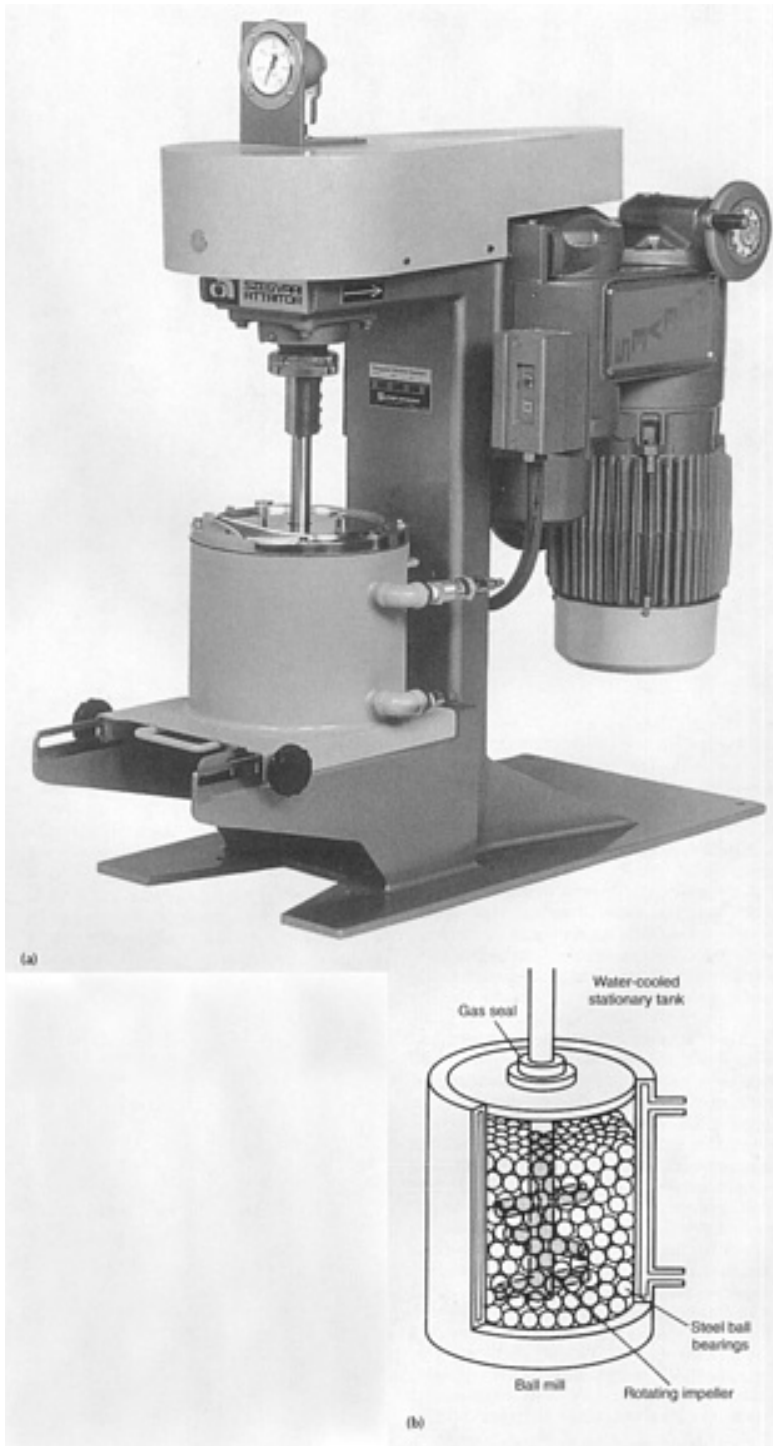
(a) Model 1-S attritor. (b) Arrangement of rotating arms on a shaft in the attrition ball mill. Courtesy of Union Process, Akron, OH
